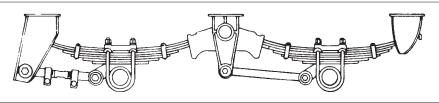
MECHANICAL SUSPENSION SYSTEM
